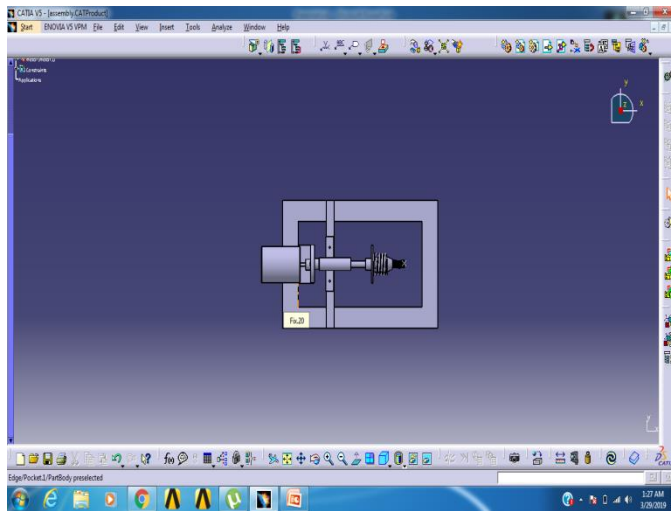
Design of Assembly Wheel Balancing Machine on CATIA software.
